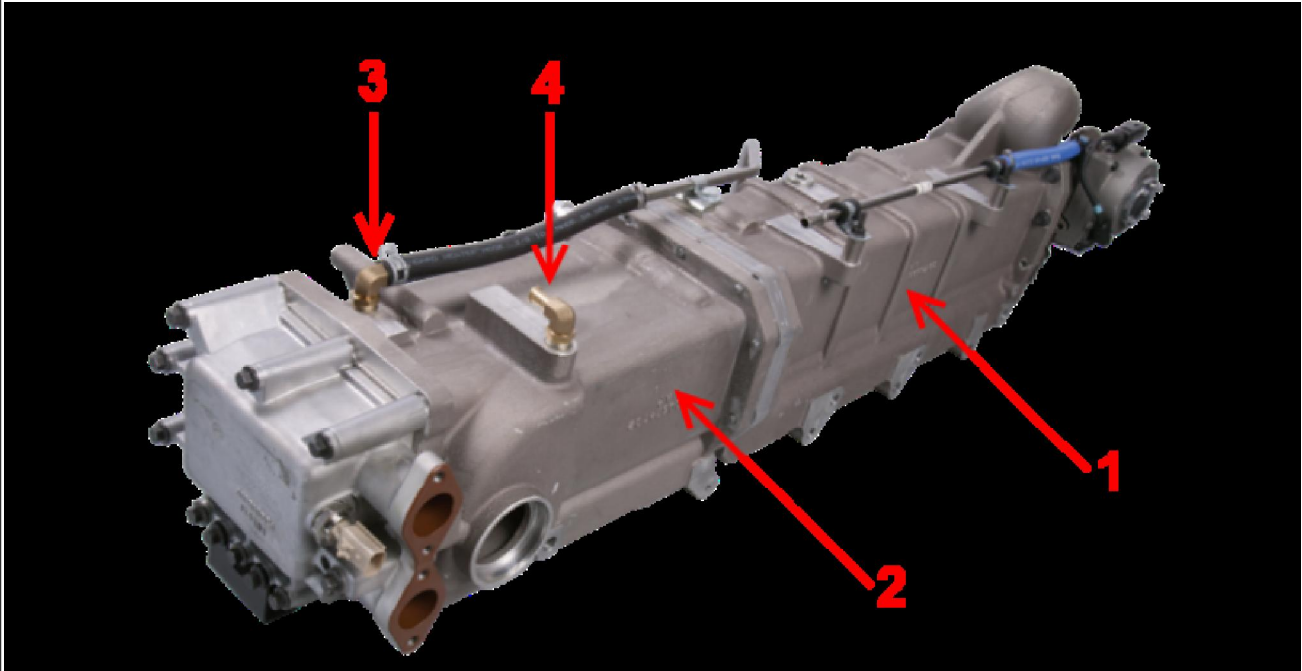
2010 MaxxForce 11/13 EGR Cooler Assembly
